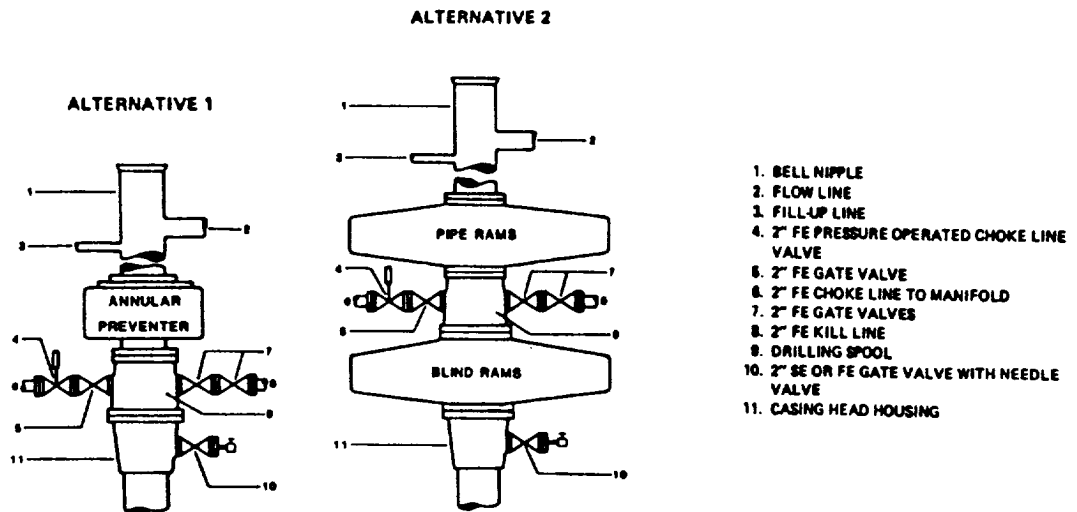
Standard Hydraulic Blowout Preventer Assembly
